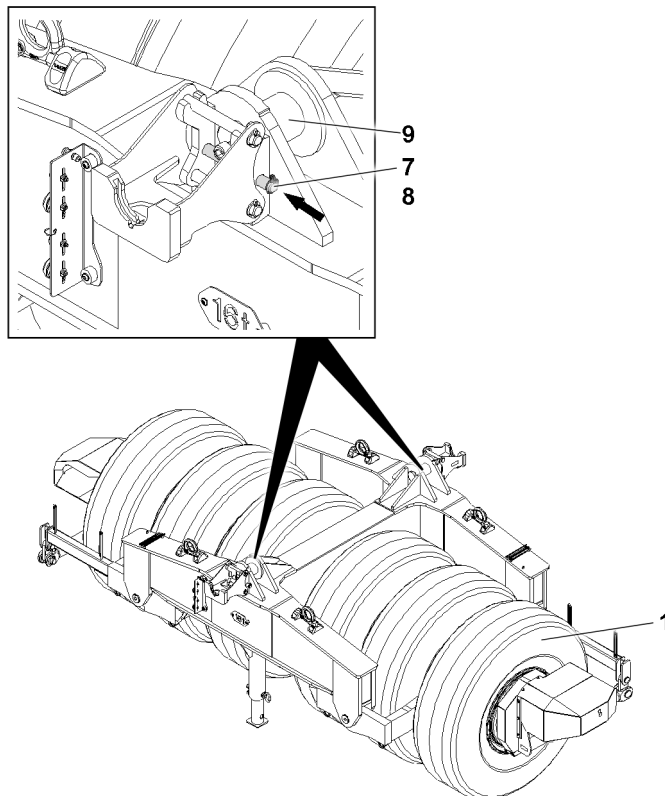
Disassembling the first wheel set – inserting the pin for transport
